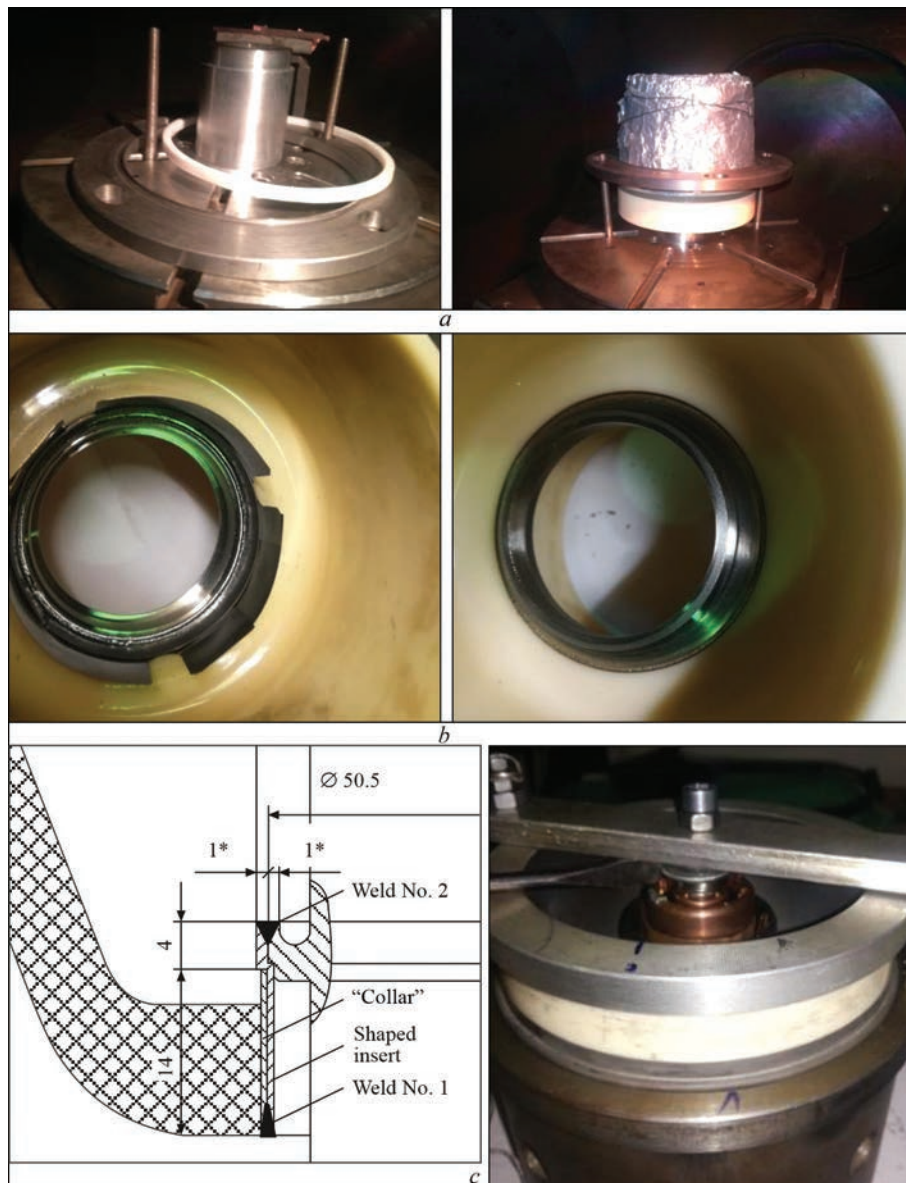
Stages of repair works according to the variant No. 1: *a* — assembly and welding device with a subassembly of insulator with a shaped circumferential insert for EBW according to the variant No. 1; *b* — appearance of the weld with a shaped circumferential insert according to the variant No. 1 after EBW and after machining the weld in size; *c* — fragment of circumferential joint of the “collar” with a shaped insert according to the variant No. 1 and final assembly
